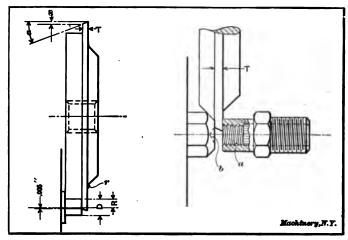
Diagram showing Dimensions of Circular Out-off Tool when it is used both for cutting-off and forming part of the Work
